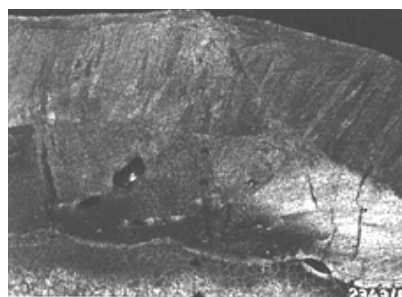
Macrostructure of the 7 mm thick surfaced layer made using the MAG method (135) and a filler metal of group Fe1 – visible cracks and gas pores
